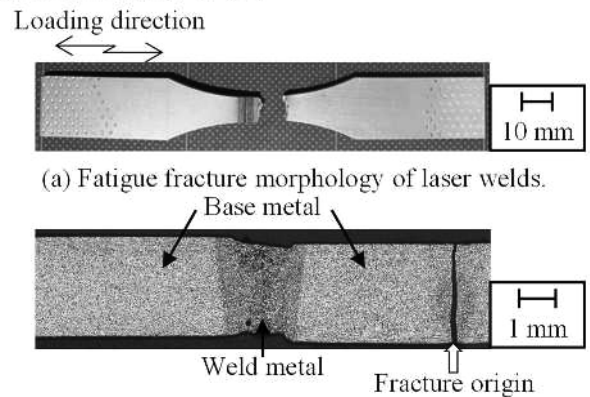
Fatigue fracture mechanism of laser welds.
